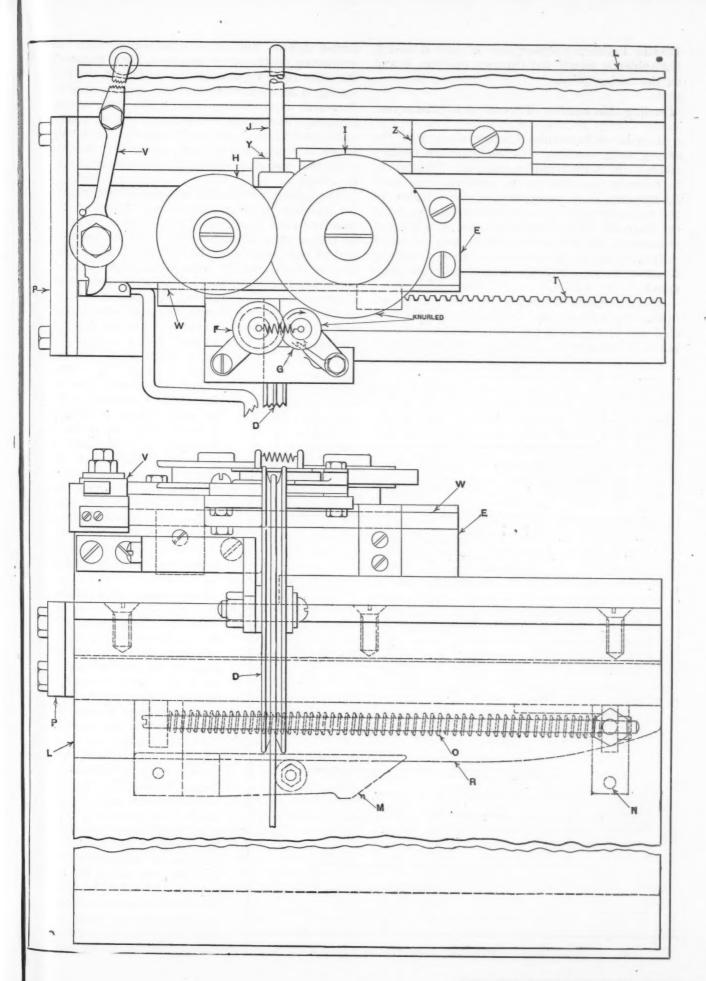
(Left) Side View of Fixture Illustrated in Fig. 2, Showing how Solder Wire is Fed on the Casing Joint, where It is
